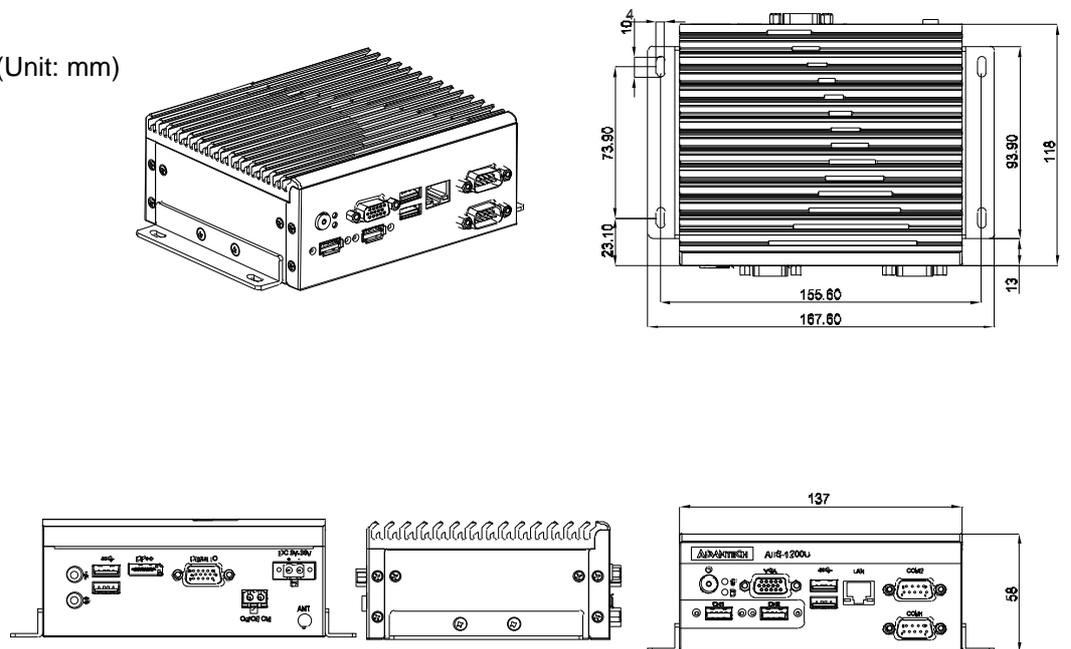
AIIS-1200U Mechanical Dimension Drawing
